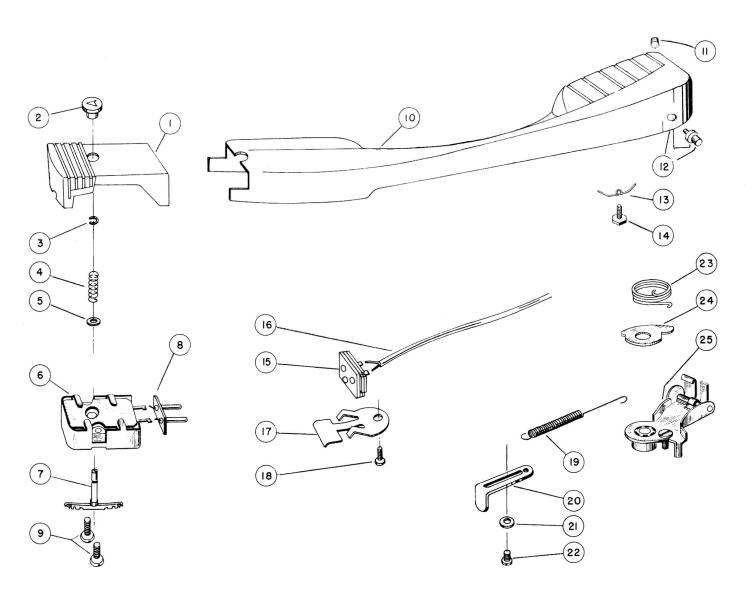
Pickup Arm Assembly for 930409-16 and-17
